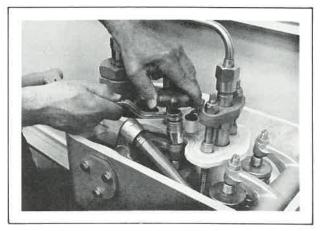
ADJUSTING VALVE TAPPET CLEARANCE USING SPECIAL TOOL, PART 147X1042.
